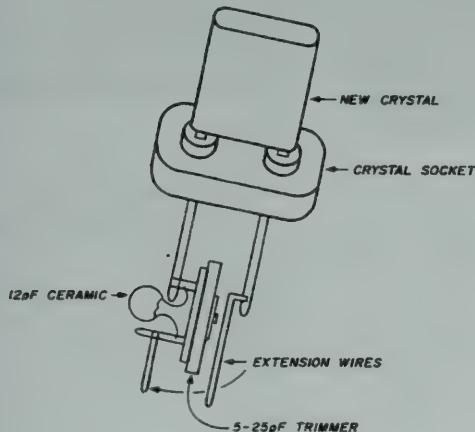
Construction of the crystal paddler, which plugs into the R-4B receiver crystal socket.
